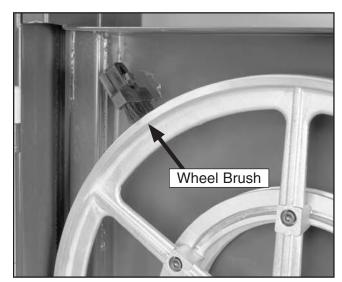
The wheel brush is located behind the lower hinged wheel cover.
